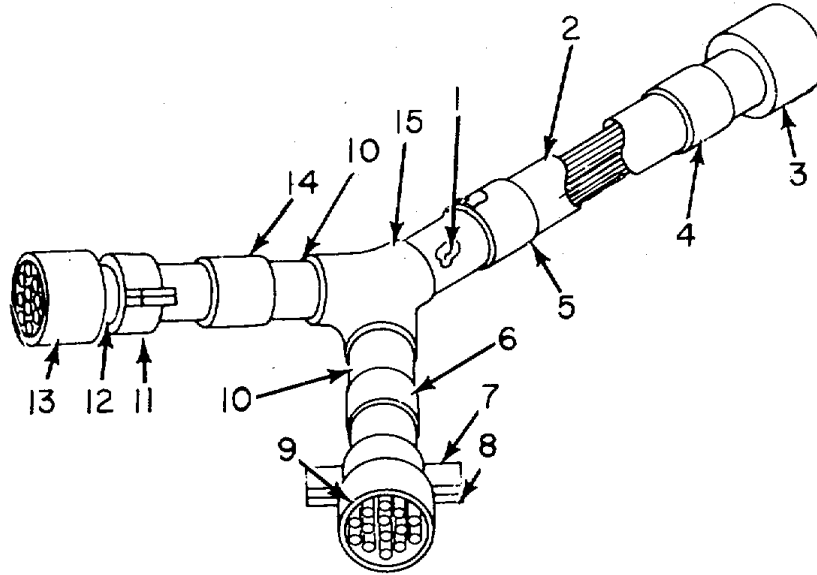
Adapter, Test MX-8839/ASM-417, Board Assembly, 6470-90184-042.
